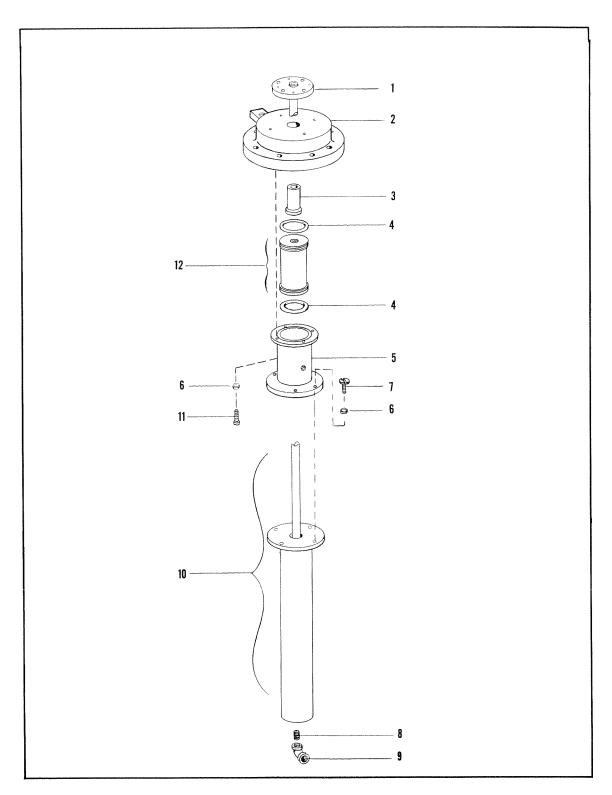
Brake and Cylinder Assembly, Exploded View
